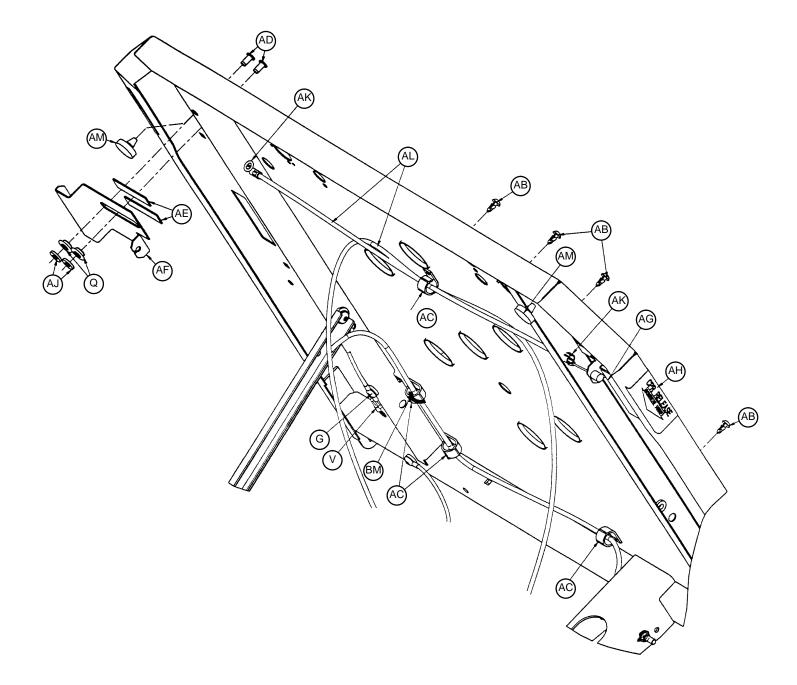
" Shorter Bed Foot Prop Installaion
